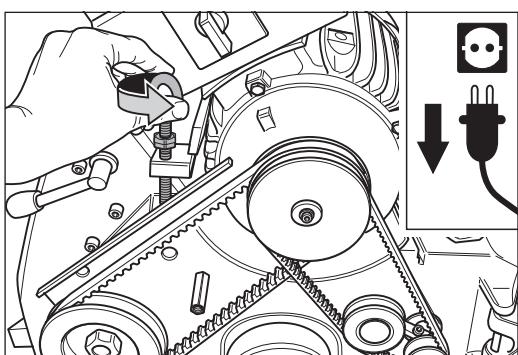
Release the V-belt tension by loosening the tensioning bolt at the motor.
